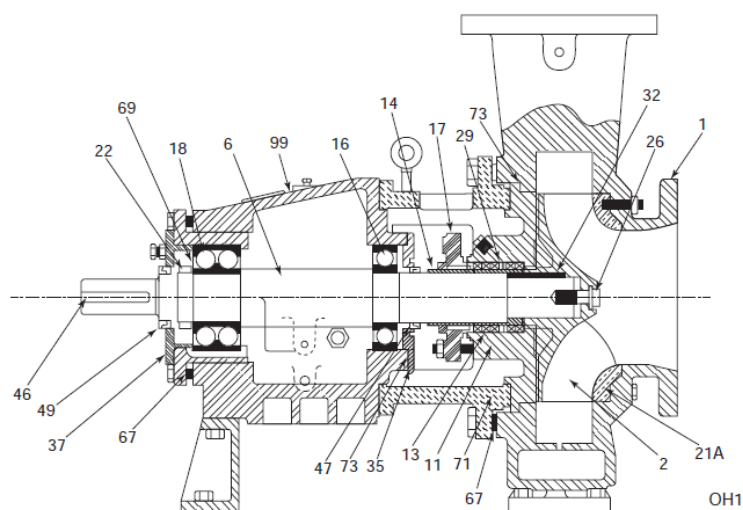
Section view of overhung (OH) single-stage pump (Hydraulic Institute 2019)
